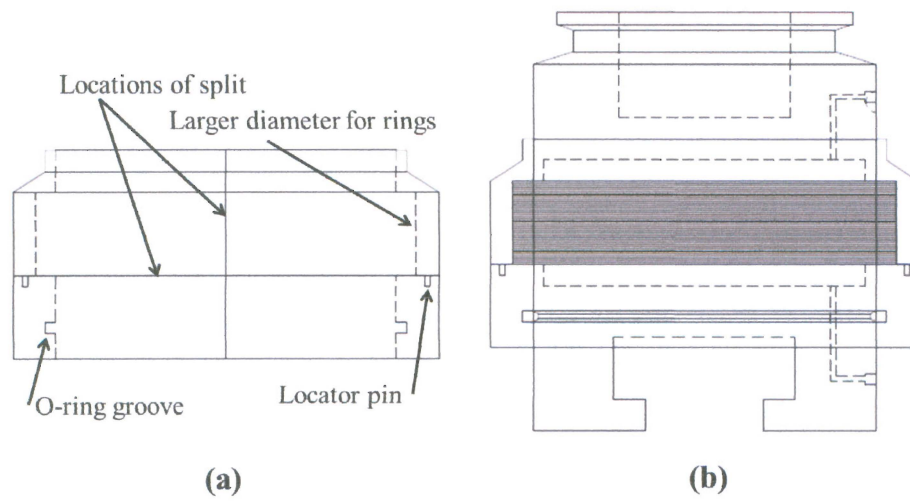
Split mold (a) cross-sectional view (b) schematic of split mold and sample
